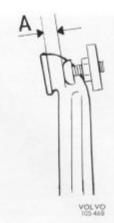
Clearance between lock handle control lever and door lock lever A = 1 - 2 mm (1/16'')
